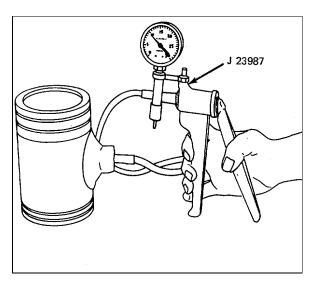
Checking Piston Pin Retainer for Proper Sealing
